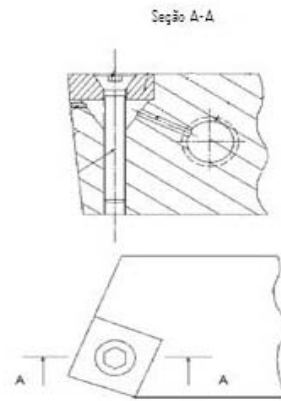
Modified tool-holder for cryogenic machining, with internal chamber (Khan and Ahmed, 2008)
